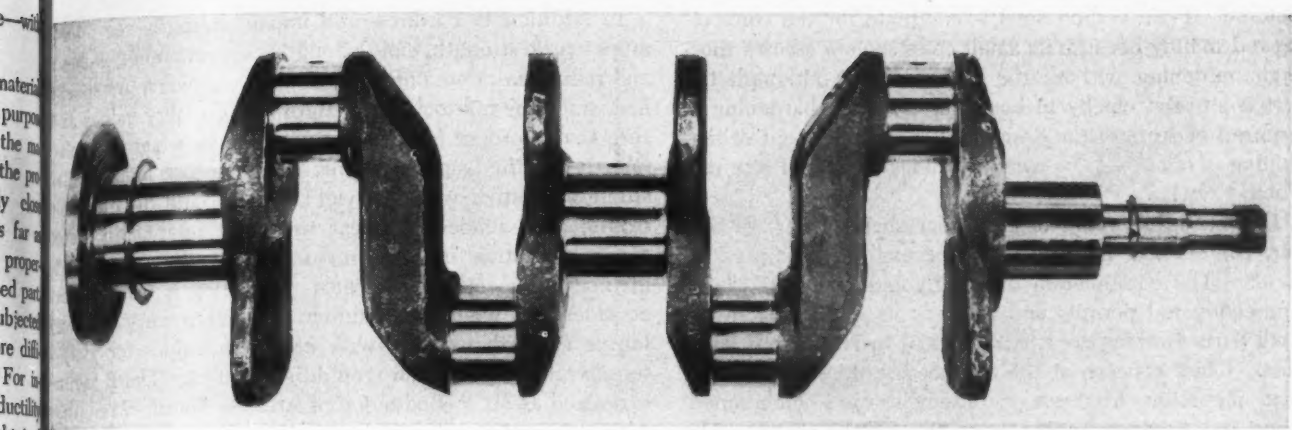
Jeep crankshaft is forging of carbon steel AISI C-1040 which, although shallow hardend, suffices because part is stressed chiefly in torsion and bending
